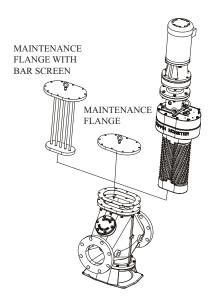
CUTTER CARTRIDGE REMOVAL
